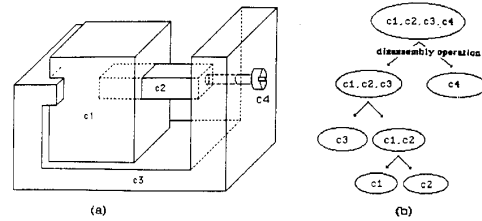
(a)Example of an assembly (b)Disassembly Graph
